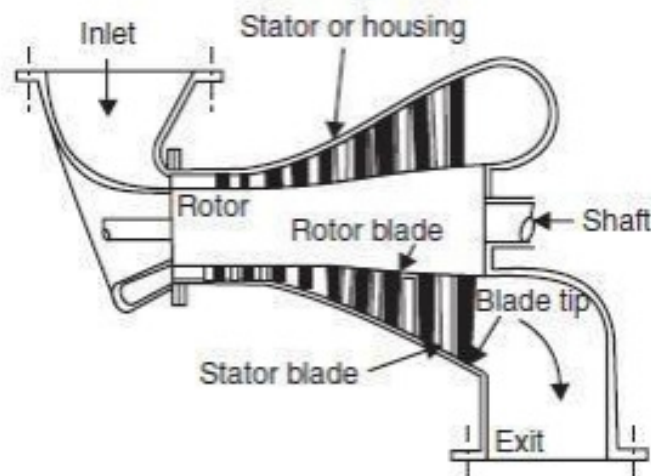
Represents the schematic cross-sectional view of a turbine showing the principal parts of the turbomachine.
